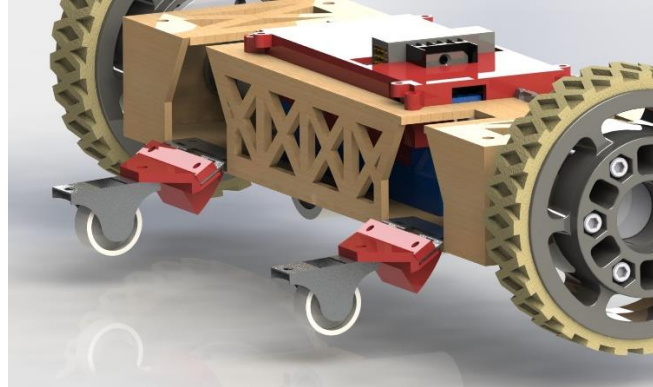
BURRITO Castor Wheel Arms Deployed
